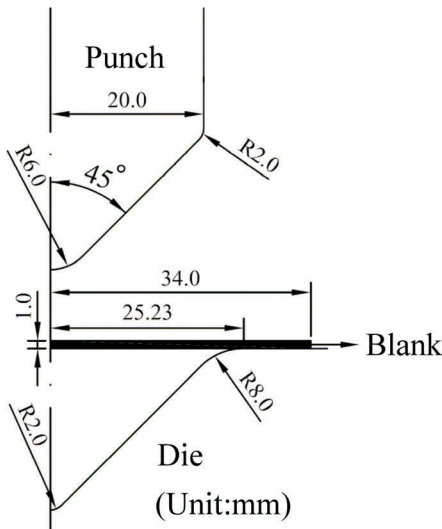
The dimensions of blank and die assembly in the V-bending process.
